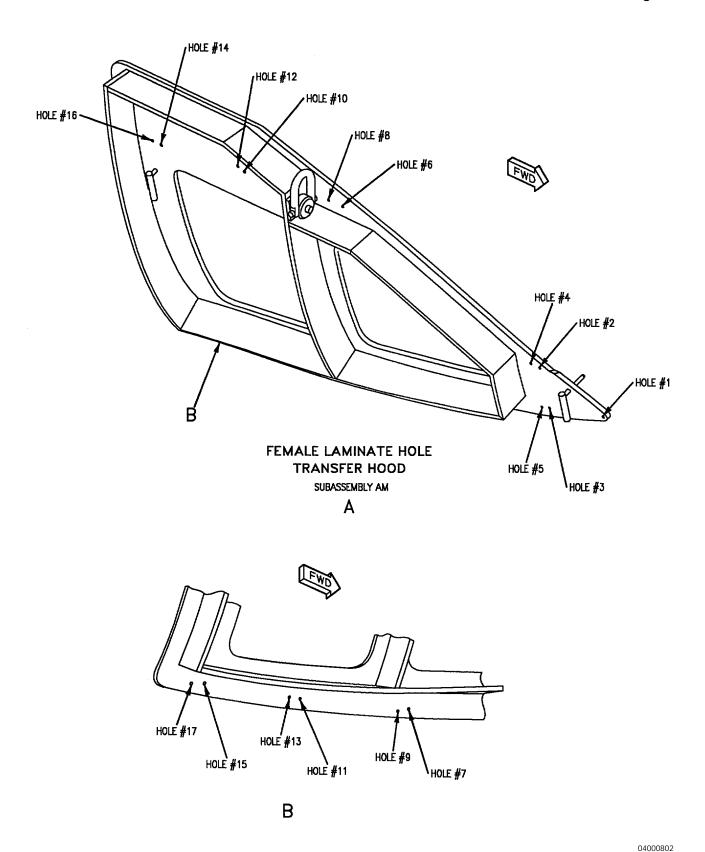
Repair to Inlet for Reinstallation on Same Aircraft (Sheet 2)
